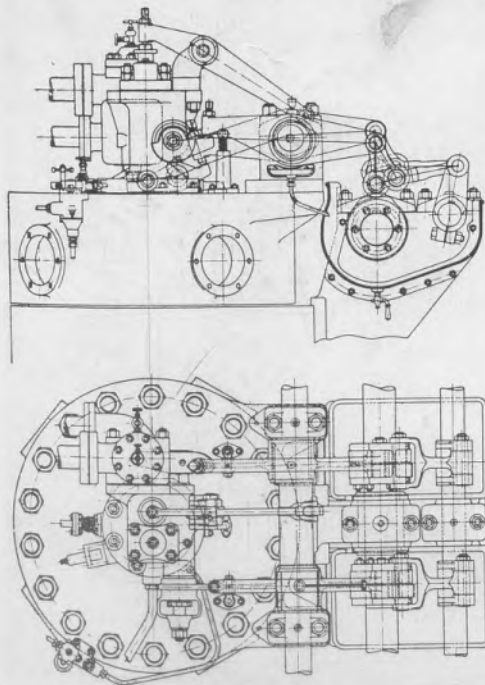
Arrangement of Sulzer valve operating mechanism
